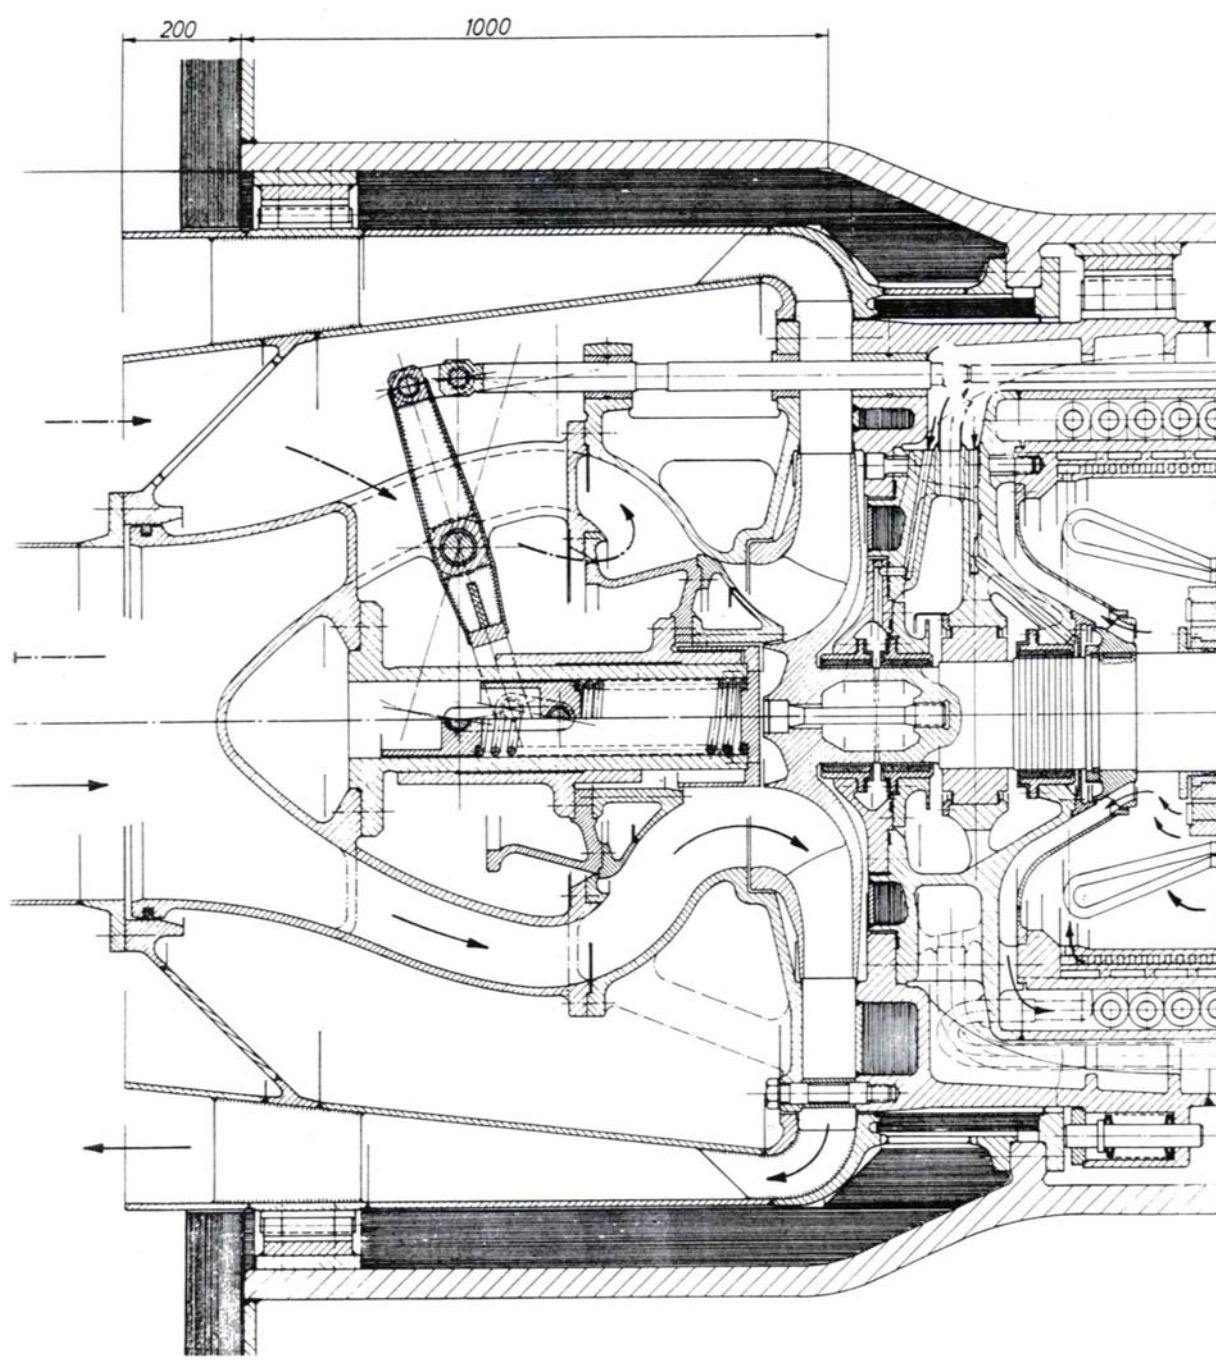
Detailed drawing of the helium circulator of THTR
